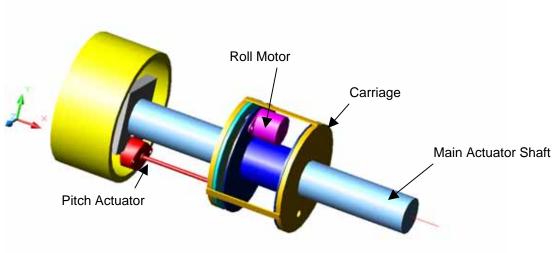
Initial Design of Pitch and Roll Mechanism.
